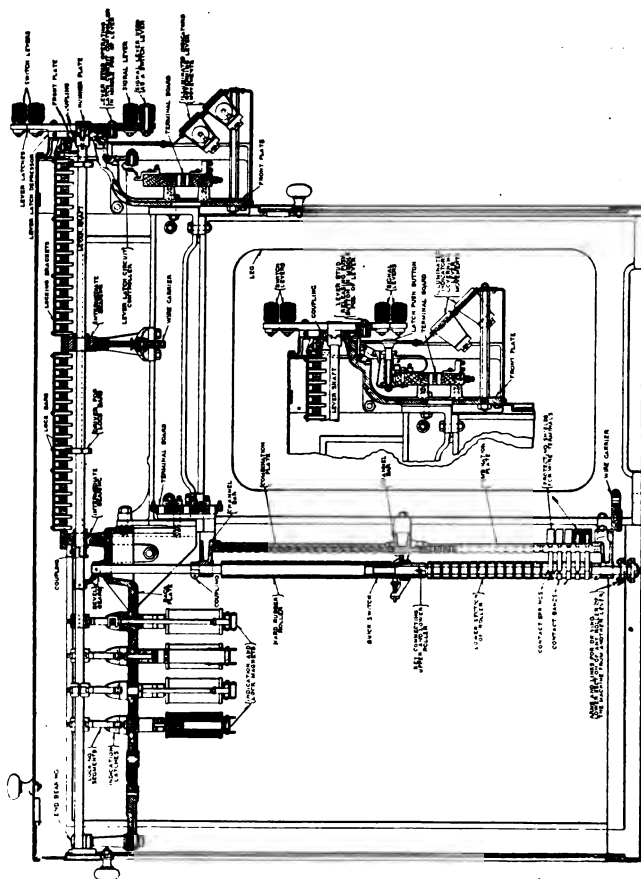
Sectional Side View Type "F" Interlocking Machine.
